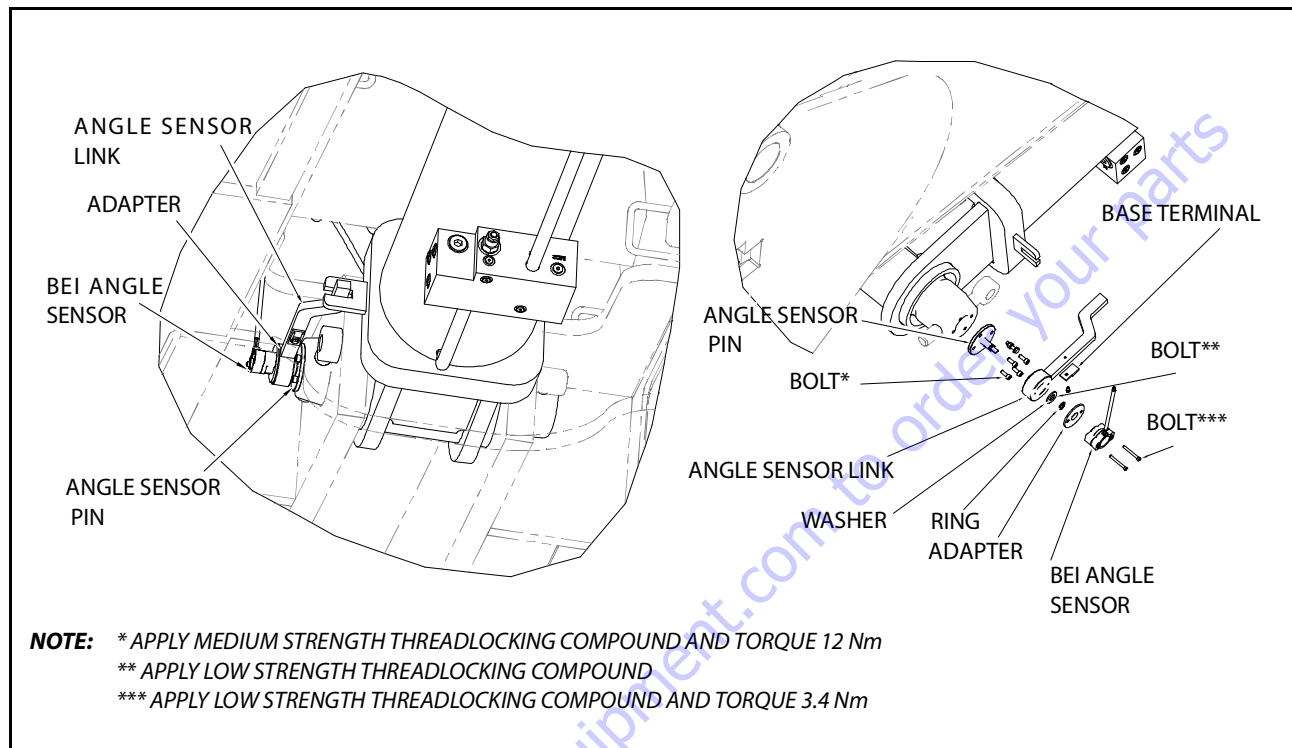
Main Boom Cylinder Angle (Protractor) Sensor
